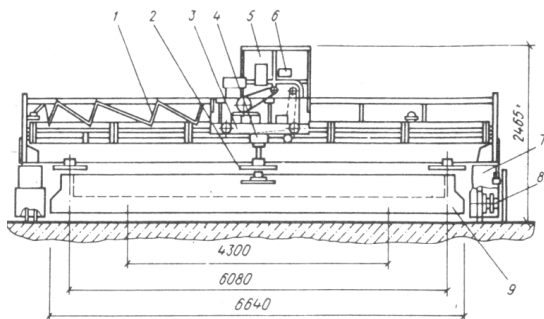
Grout machine: 1 - fence; 2 - disk; 3 - cart; 4 - grout head; 5 - operator's seat; 6 - control panel; 7 - portal; 8 - portal movement drive; 9 - form
